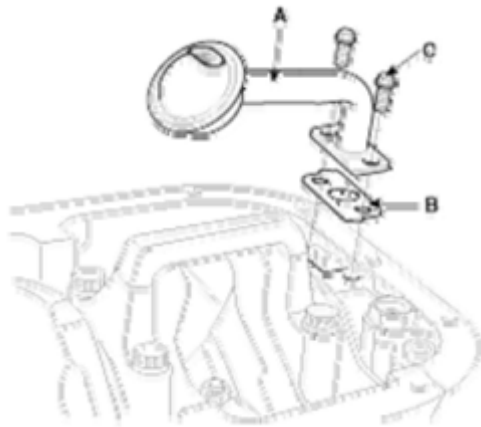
Identifying Oil Screen, Gasket, & Bolts
